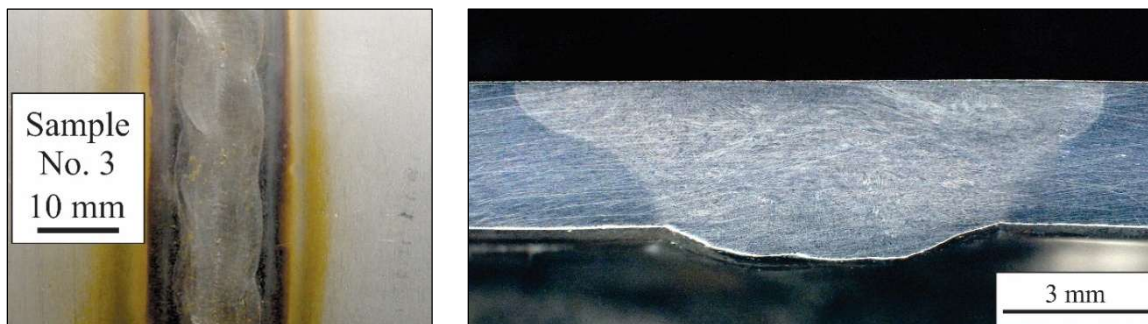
Specimen N° 3 - TAG, 210 A, no filler material
